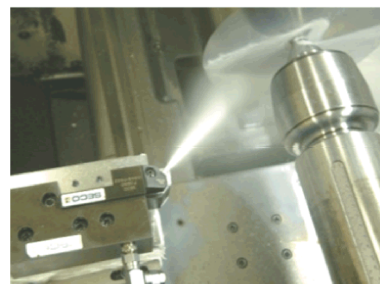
(b): High Pressure Waterjet Assisted Machining (HPWAM)
